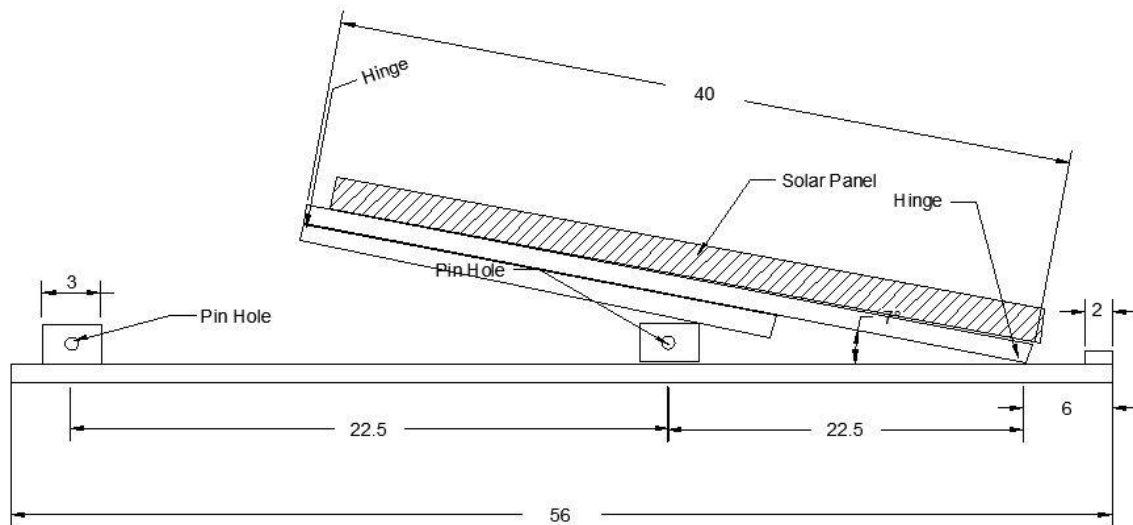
Side View of Solar Panel Adjustable Frame at 7°, units in inch
